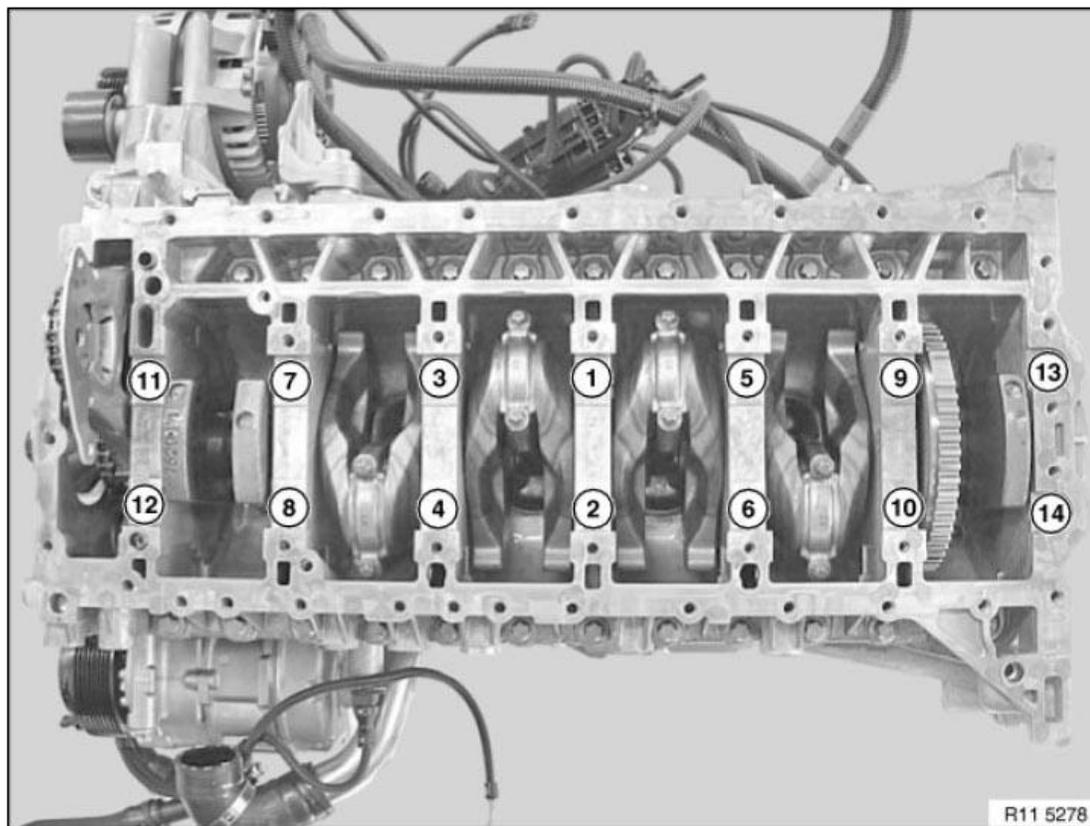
Identifying Crankcase Bolts Tightening Sequence
